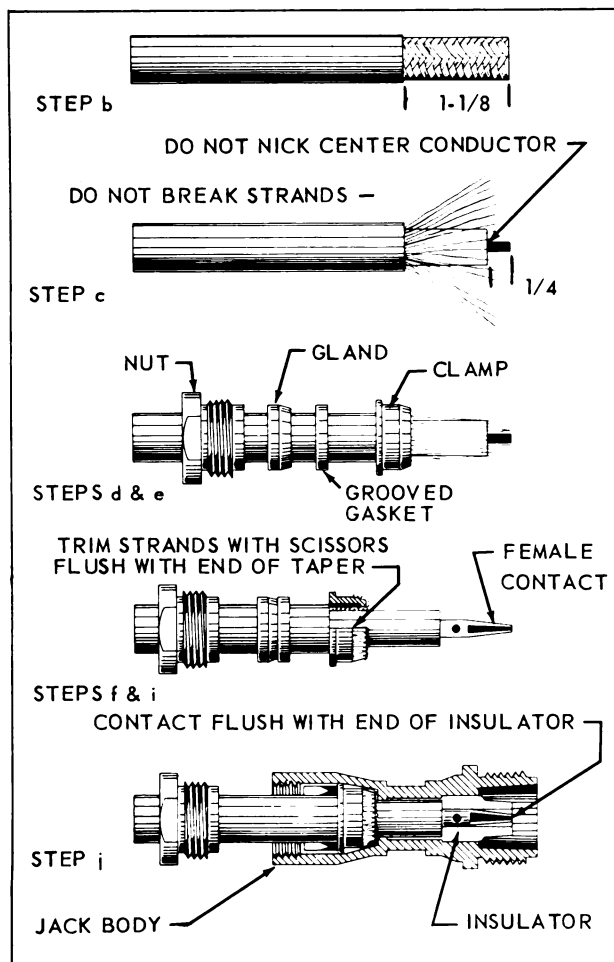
Attaching Air Force Version HN Connectors to Coaxial Cable
